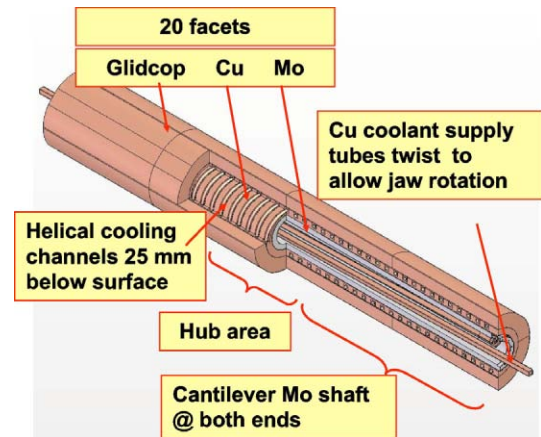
Cutaway of jaw showing outer jaw surfaces, cooling tube and inner moly shaft. The outer jaw is only supported by the moly shaft near the center in the “hub” area.
